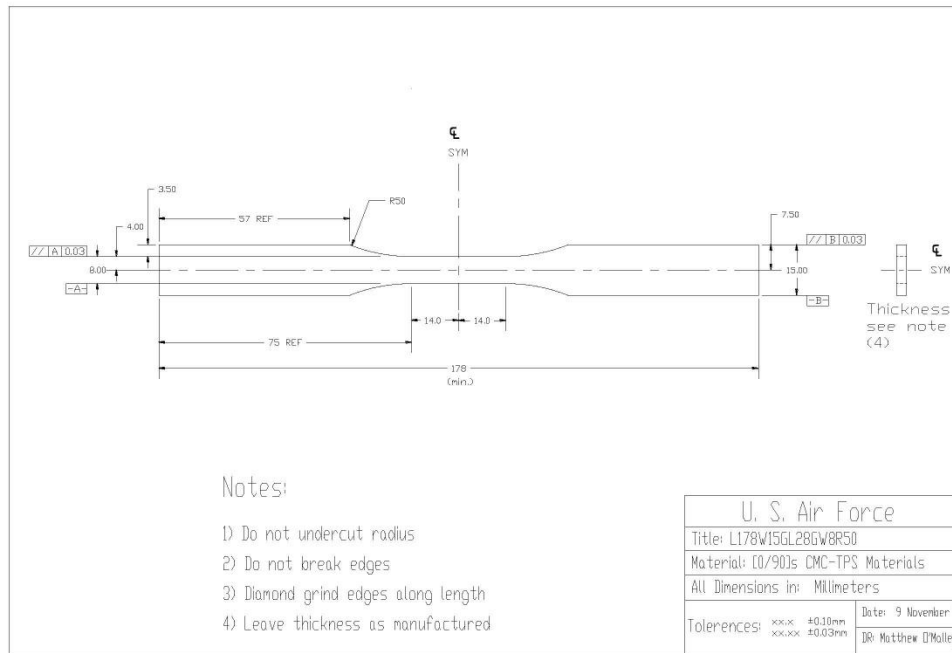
Machining Drawing For Dogbone Specimen Used For Tension and Creep Rupture Testing
